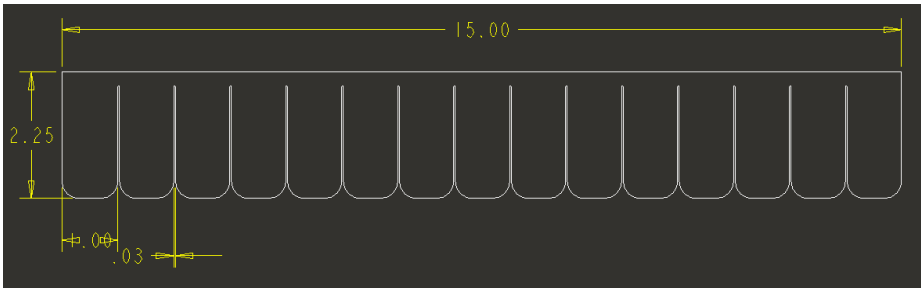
2D dimensioned drawing of vertical aluminum strip
